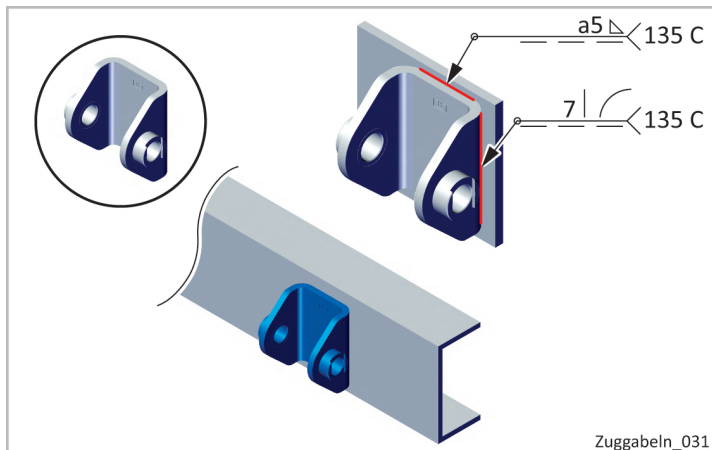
Minimum weld seam figure for drawbar shoes
